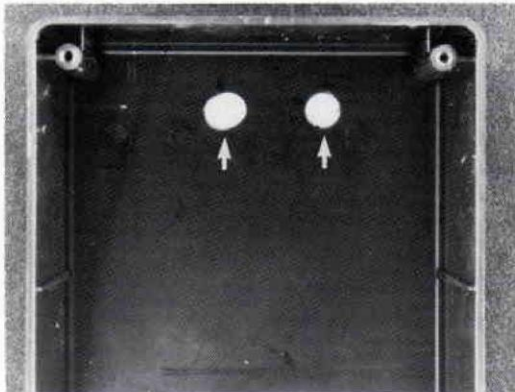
H. Use a $\frac{3}{8}$ " H.S. drill to drill a hole for plugs.
